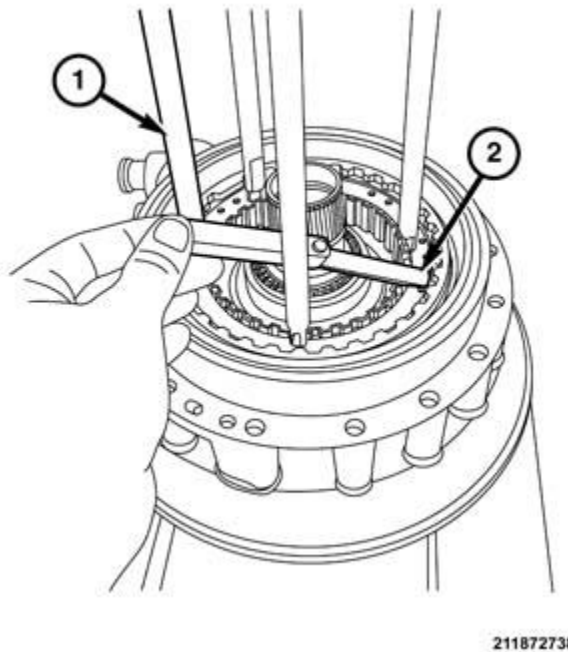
Measuring Gap Between A-Clutch Backing Plate & Snap Ring
